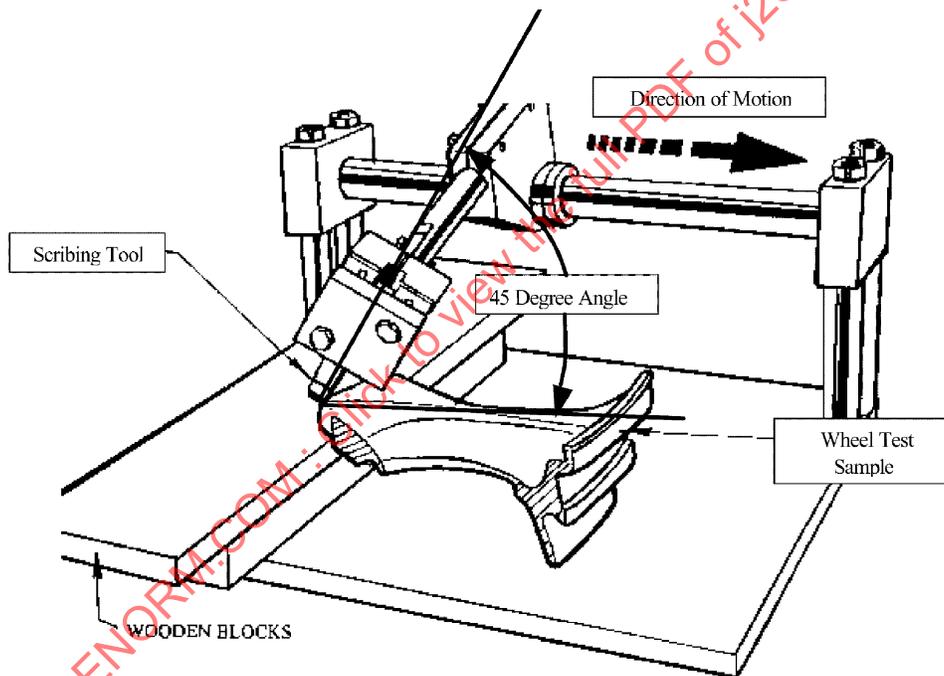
LABORATORY SCRIBE FIXTURE WITH TEST SPECIMEN
